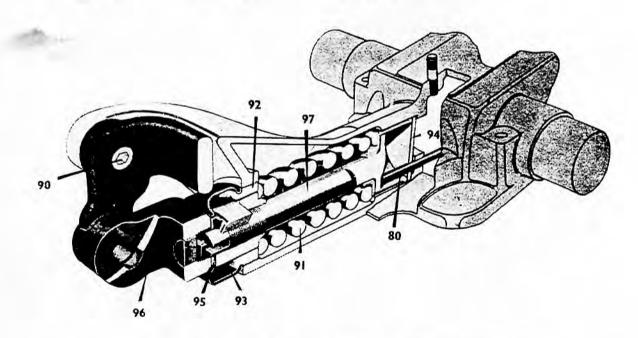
SECTION THROUGH THE CONTROL SPRING
